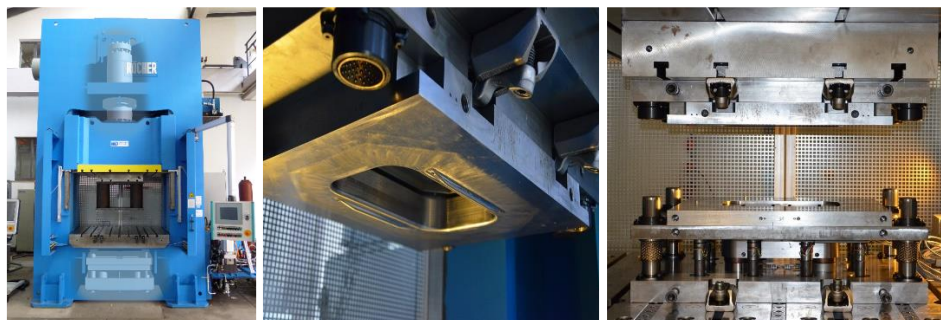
Test setup: a) hydraulic press, b) die, c) complete forming tool
